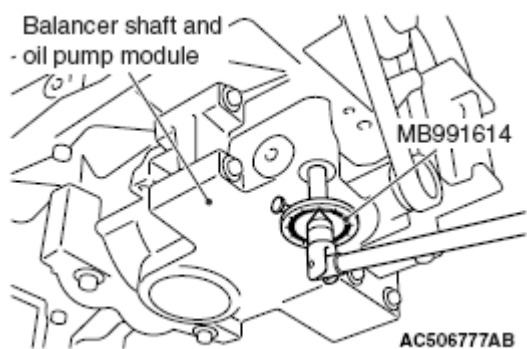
Tightening Balancer Shaft And Oil Pump Module Mounting Bolt Using Angle Gauge
